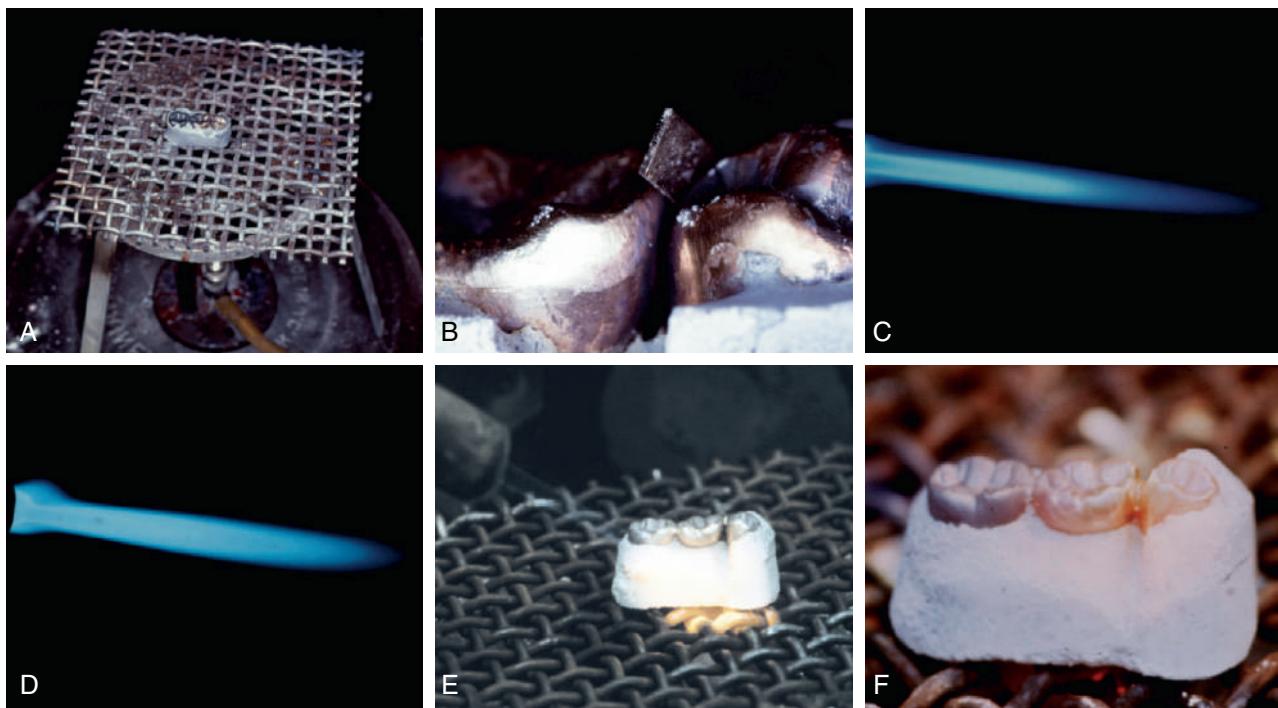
Low-heat torch soldering. (A) The assembly positioned on a wire mesh over a Bunsen burner. (B) A flexed piece of solder is placed into the connector area. (C) A sharply defined flame is preferable for casting procedures. (D) A brush flame is more suitable for soldering. This can be obtained by slight reduction in the amount of air. (E) The assembly is heated evenly until the solder melts. The solder must “spin” in the connector area to form a complete connection (F).
